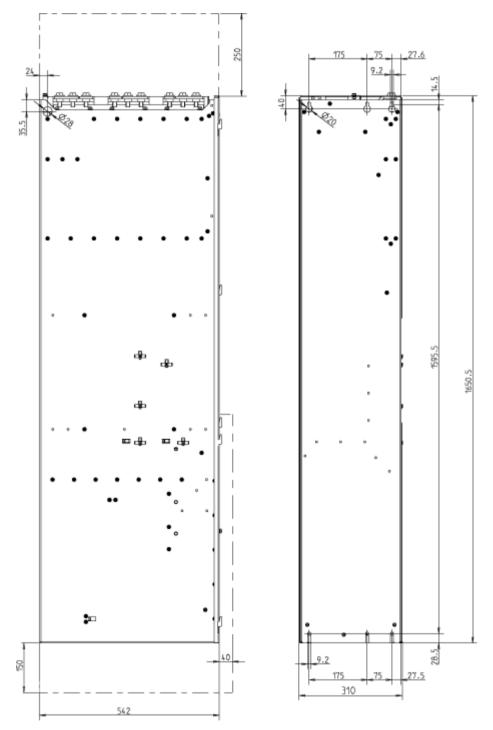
Dimension drawing, Basic Line Module, frame sizes GB, GD. Side view, rear view
